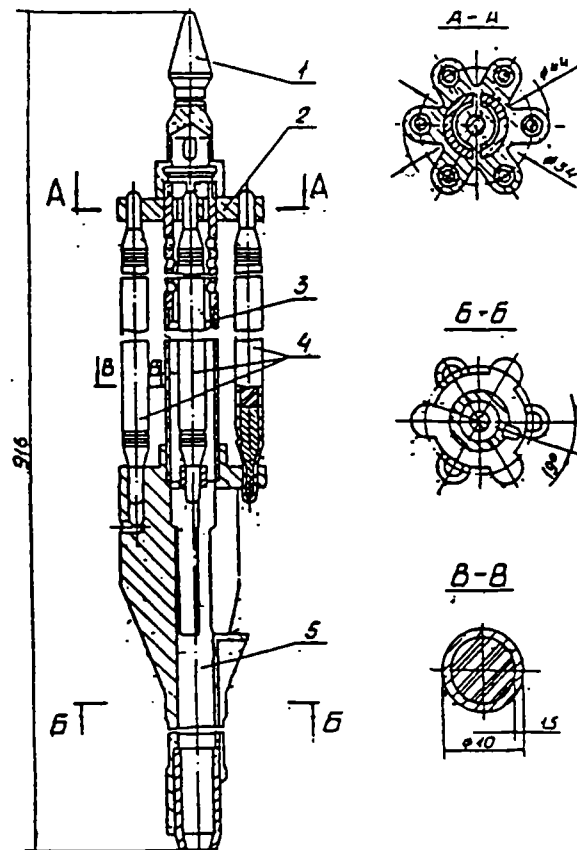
Fuel assembly of the RG-1M reactor, 1 - cap; 2 - upper grid; 3 - tube; 4 - fuel elements; 5 - ending part.
